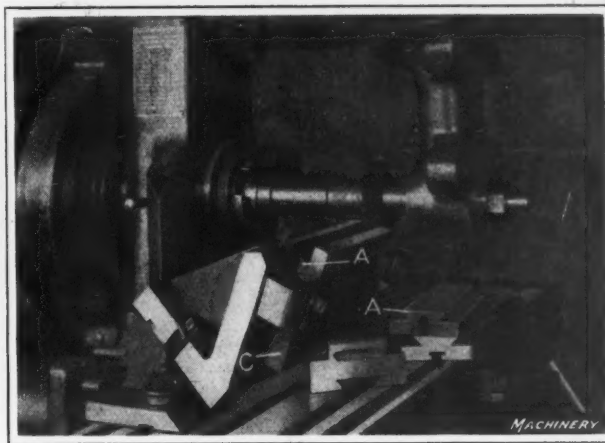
Fixture for holding Bottom Slide during the Milling Operation on the Dovetail
